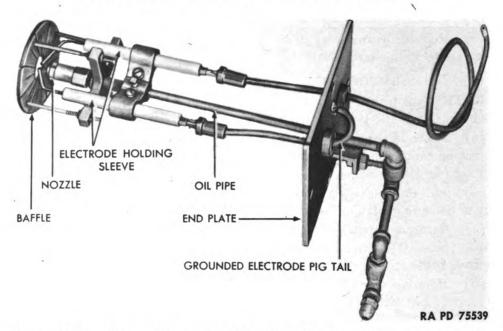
Steam Generating Plant Electrode and Nozzle Assembly
